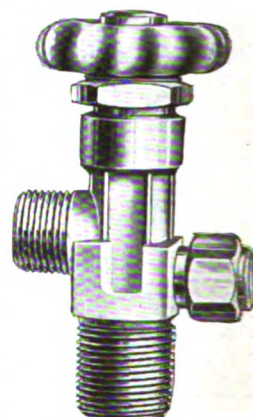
HIGH PRESSURE CYLINDER VALVE
